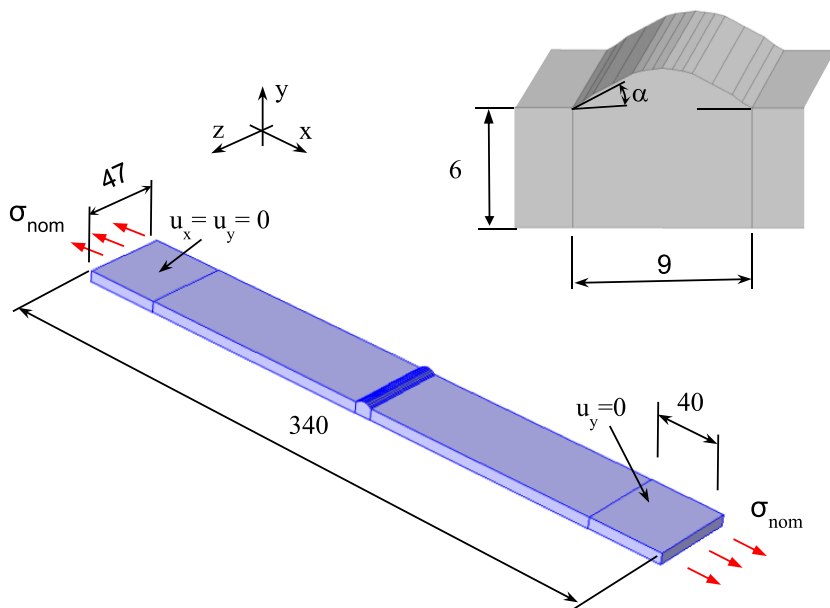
Geometry of the butt-welded joint under axial loading σ_{nom} ³⁴ (dimension in millimeters; $\alpha = 30^\circ$) [Colour figure can be viewed at [wileyonlinelibrary.com](https://onlinelibrary.wiley.com/doi/10.1111/ffe.13812)]
